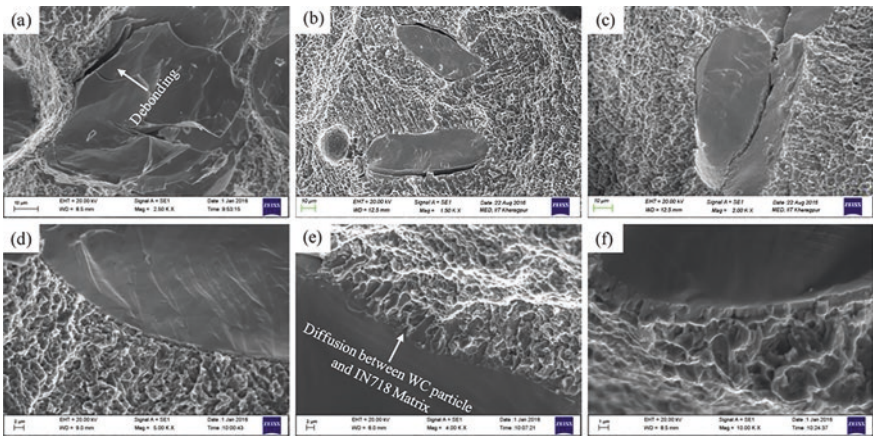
Fracture surfaces of clad layer showing the bonding condition between the ceramic particles and the metal matrix deposited with 1200 W laser power and scan speed of (a) 1200 mm/min, (b) 1000 mm/min, (c) 800 mm/min, (d) 600 mm/min, (e) 400 mm/min, and (f) 200 mm/min (Muvvala et al. 2017a)
